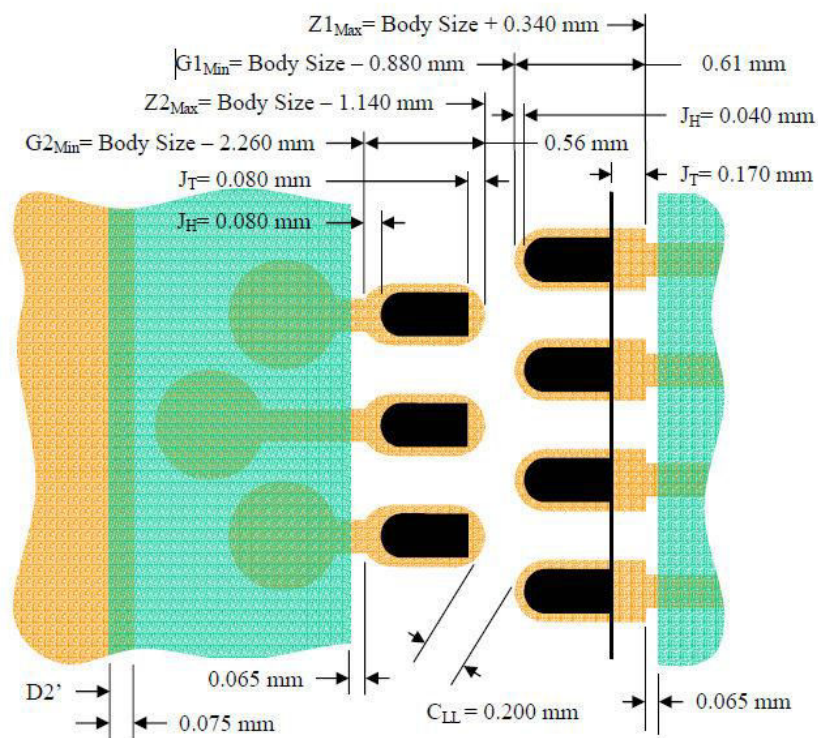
Land pattern of PCB for 0.5mm pitch DRQFN
